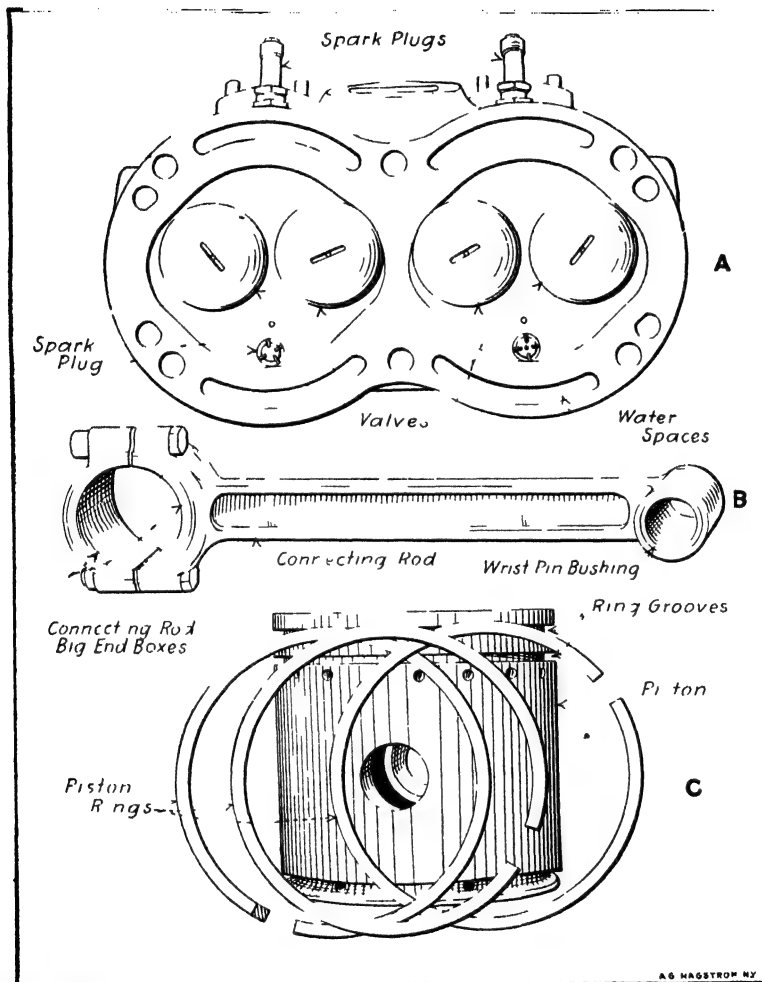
Parts of Early Sturtevant Aviation Engine. A—Cylinder Head, Showing Valves. B—Connecting Rod. C—Piston and Rings.
